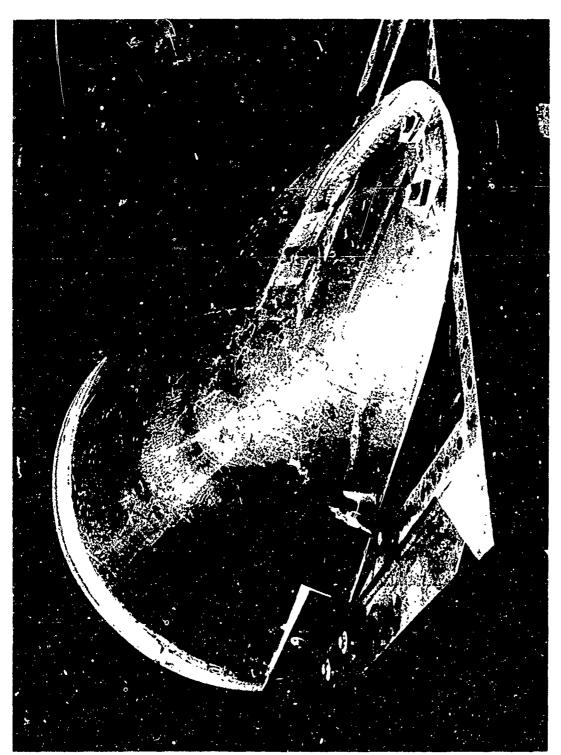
Single-Plece Cone Wedge Section Type Windshield Test Installation
